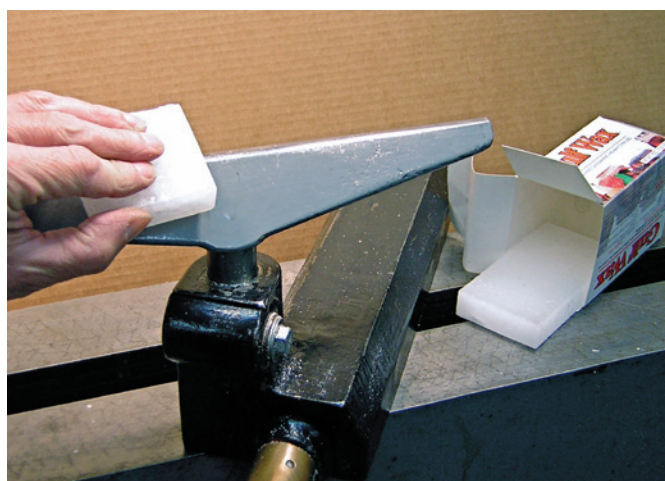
Paraffin wax is a convenient, inexpensive way to lubricate the tool rest and the lathe bed.
